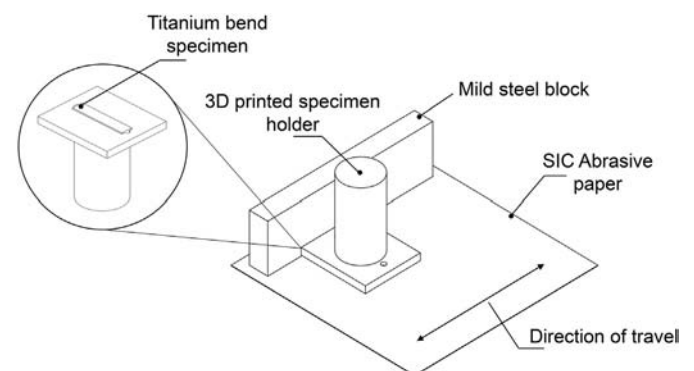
Fixture for abrading parallel and perpendicular scratched surfaces.
